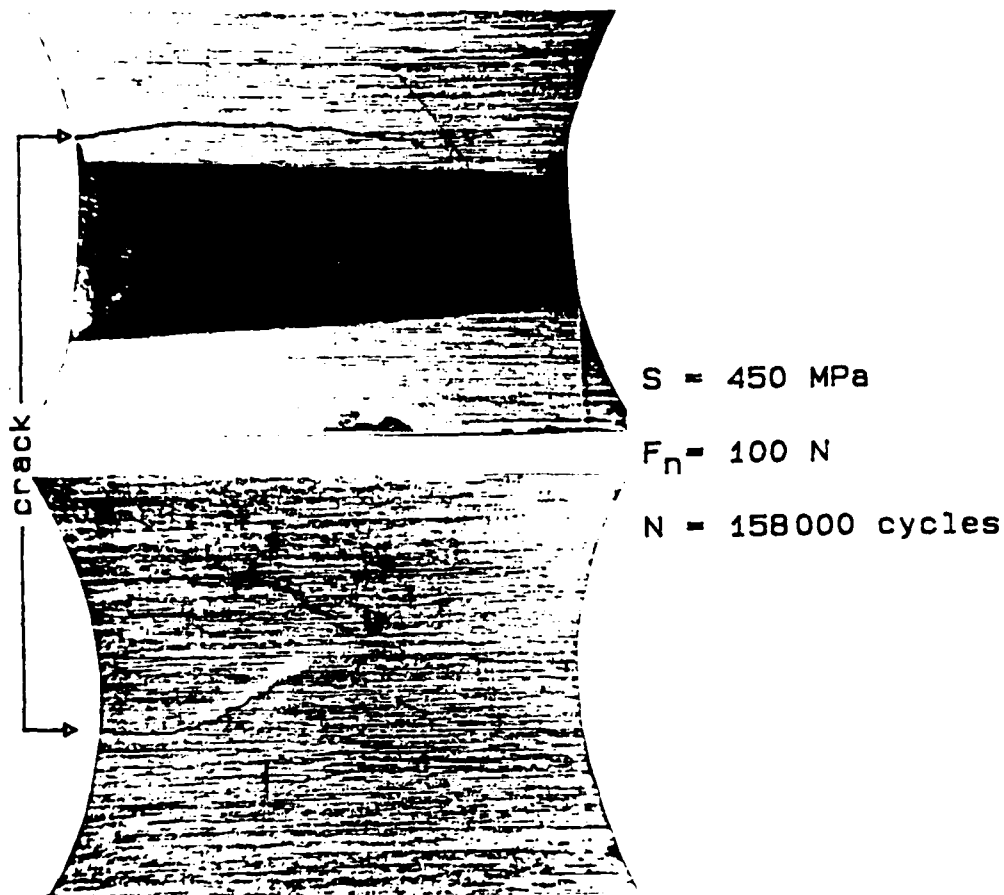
Crack in a perpendicular polished specimen which cuts the surface beside the fretting scar. Roughness $0.34 \mu\text{m}$ CLA, specimen number 393.
